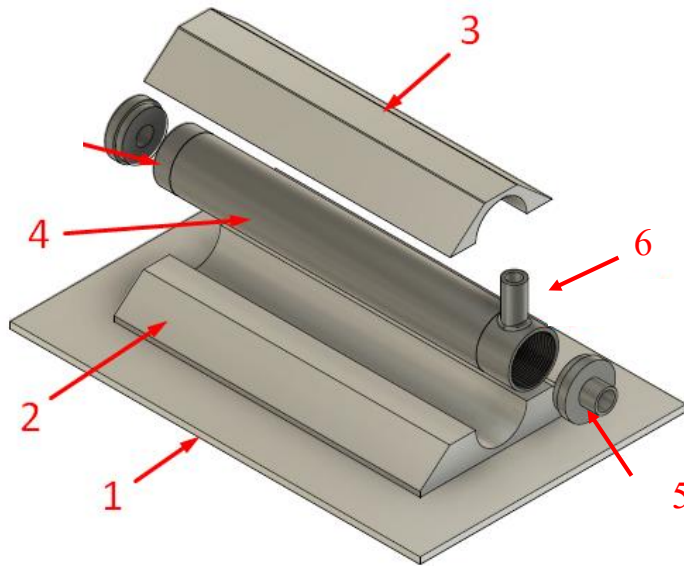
Design of the prismatic composite saddle: 1 - Cooled surface; 2 - Lower saddle section; 3 - Upper saddle section; 4 - Capillary pump housing; 5 - Liquid inlet; 6 - Vapor outlet.
